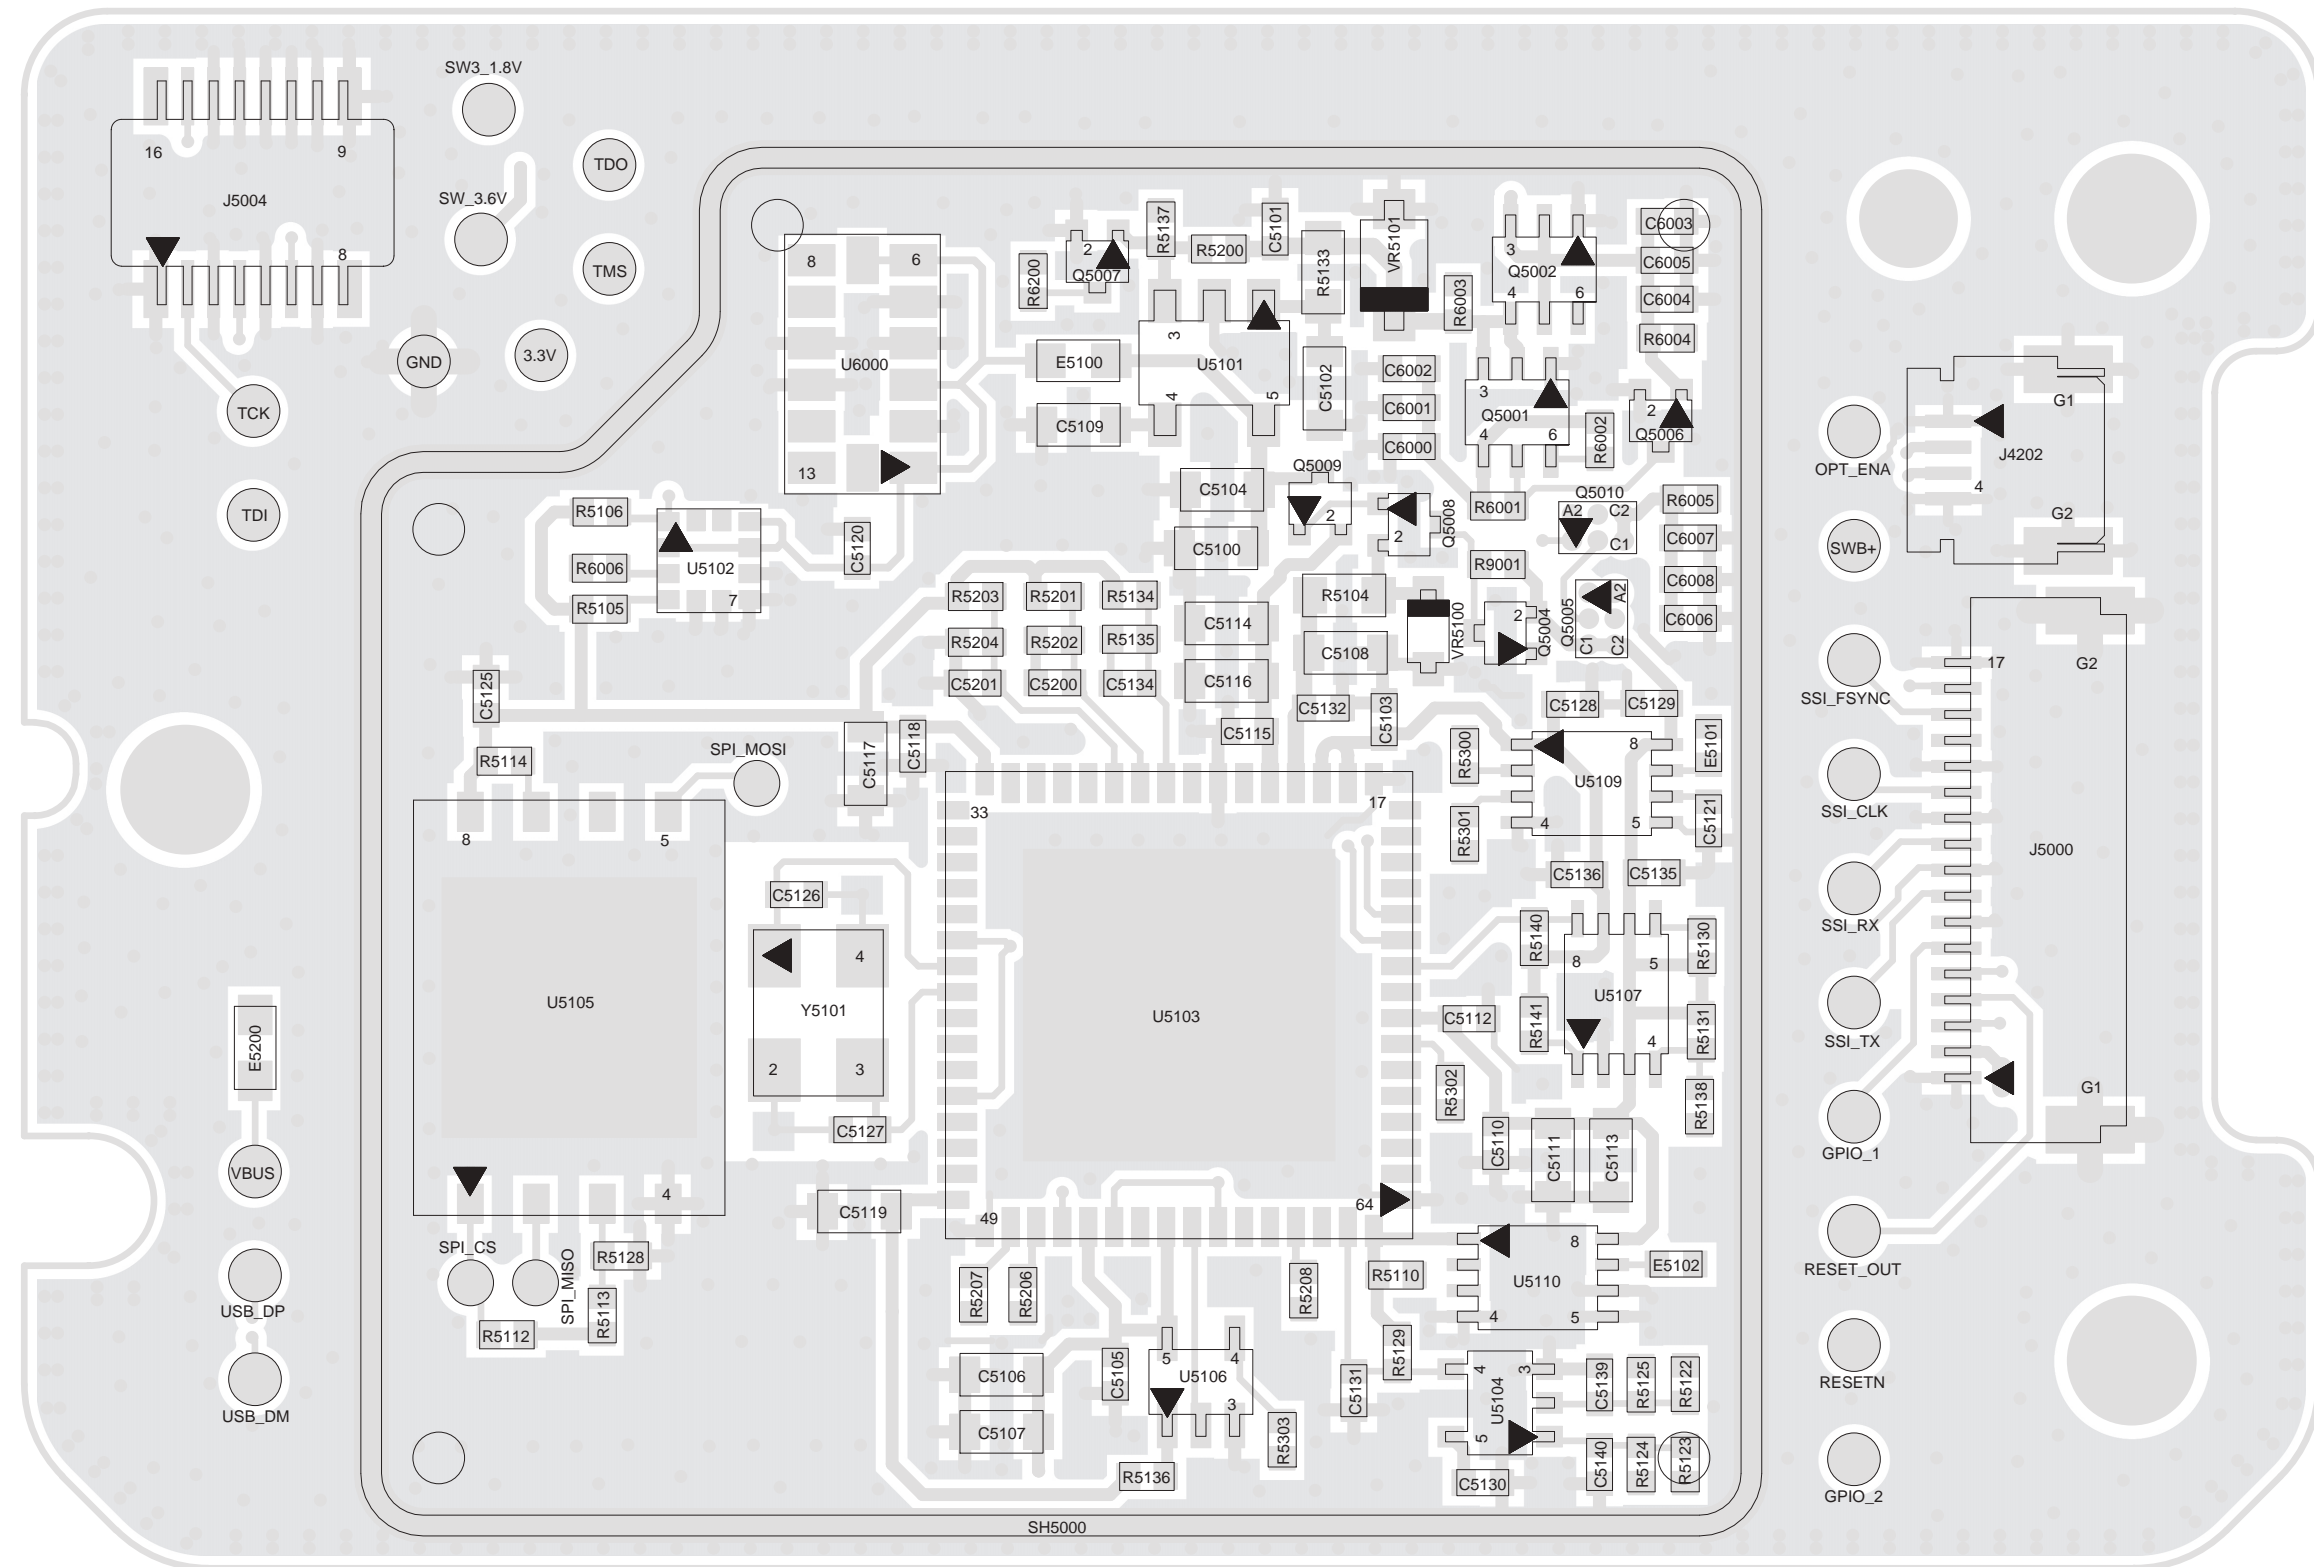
GOB Board Bottom Side PCB No. PC000957A01\_CA
